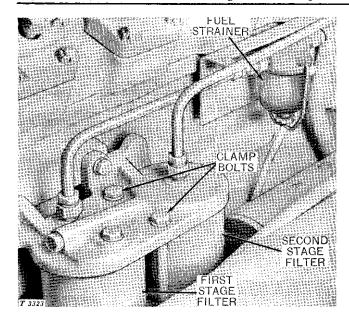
Fuel Strainer and Fuel Filters (-42000)
